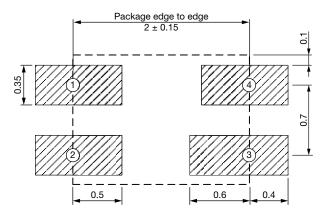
VEML3328A3OG PCB Layout Footprint
